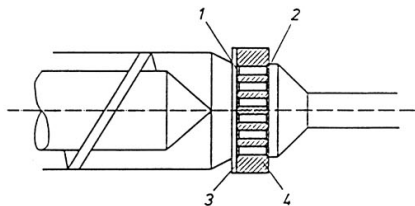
Example of a breaker plate assembly. 1 Inlet, 2 Outlet, 3 Screen pack, 4 Breaker plate
